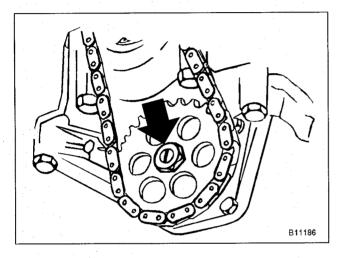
Oil pump sprocket mounting nut (left-hand thread) on 6-cylinder engine (arrow).
